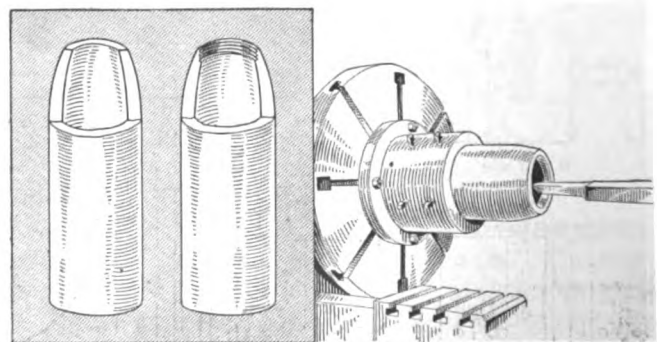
OPERATION 10: FACING OPEN END AND CUTTING THREAD
